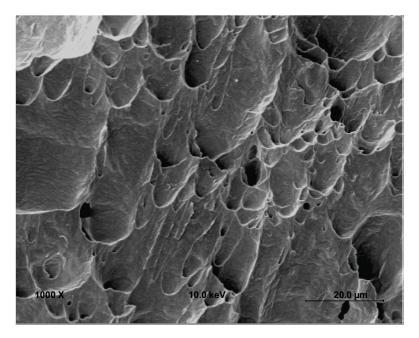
The back end of the specimen fracture surface. The surface here is plastically deformed with a great amount of dimples.
